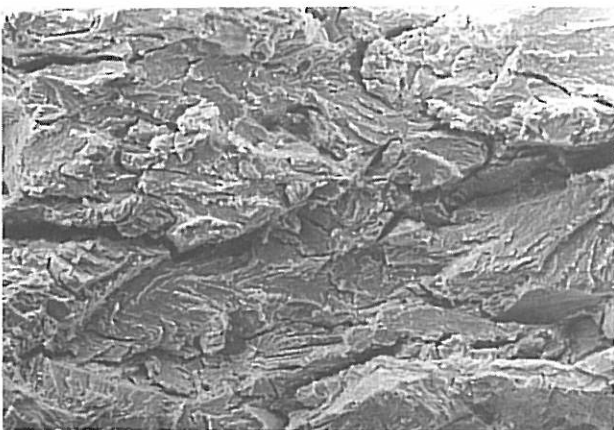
S.E.M. fractograph of a 5 h sensitized 304 austenitic stainless steel specimen strained in solution at a crosshead speed of 9.8 nm/s. Fractograph shows transgranular cleavage and little intergranular fracture.
